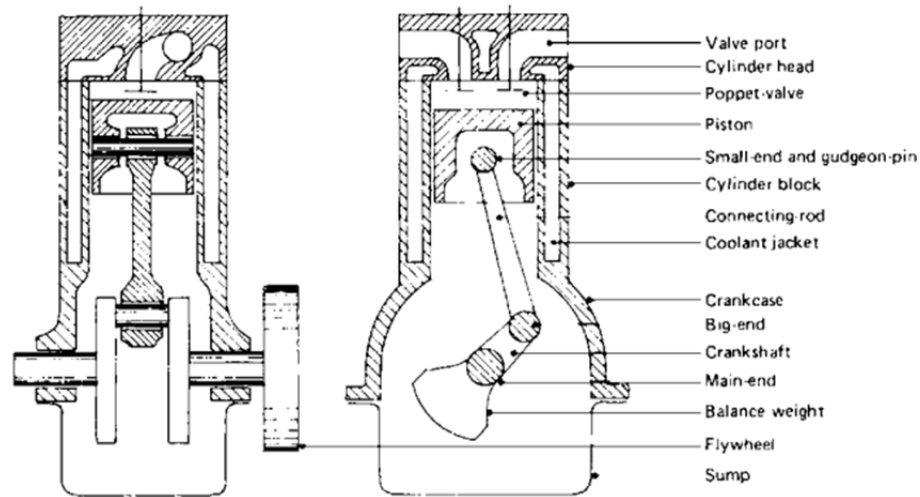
Sectional View of Basic Engine (Crolla, David A., 2009)
